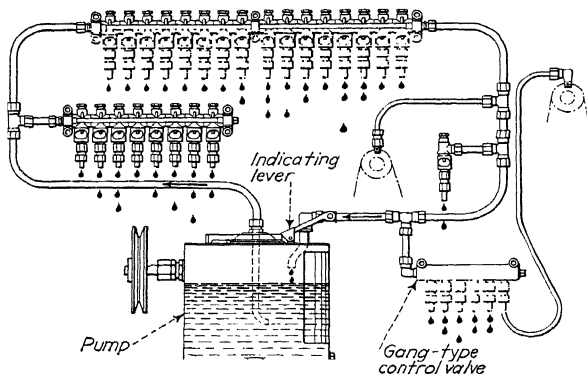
Automatic centralized oiling system, showing discharge to bearings. (Courtesy Rivett Lathe and Grinder, Inc.)
